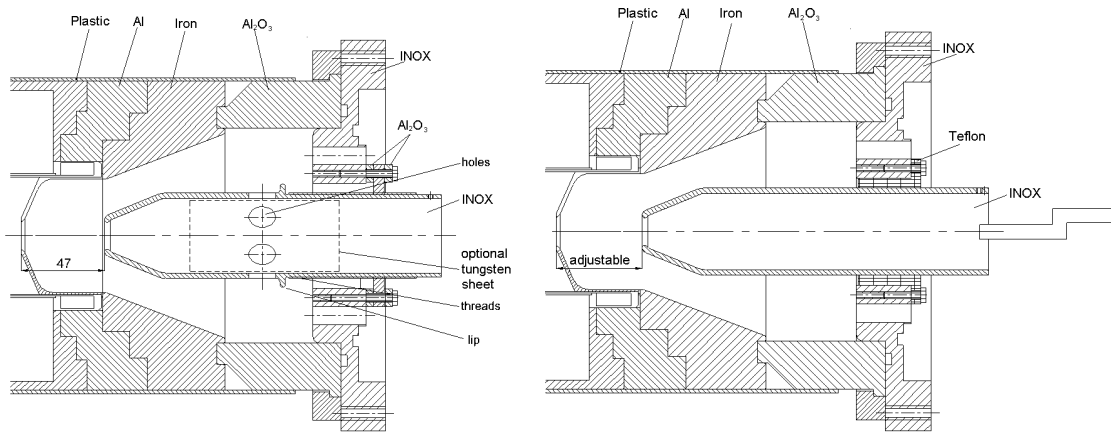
Standard (left) and new movable (right) puller mounted in the extraction region. The optional tungsten sheet in the old design is not necessary for a functional puller.
